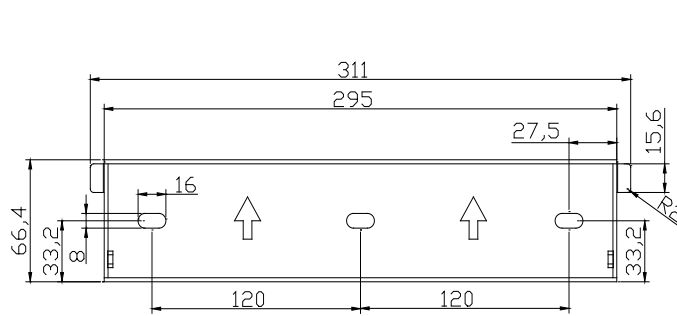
Dimensions of rear panel of R5-3K/3.6K/4K/5K/6K-S2
